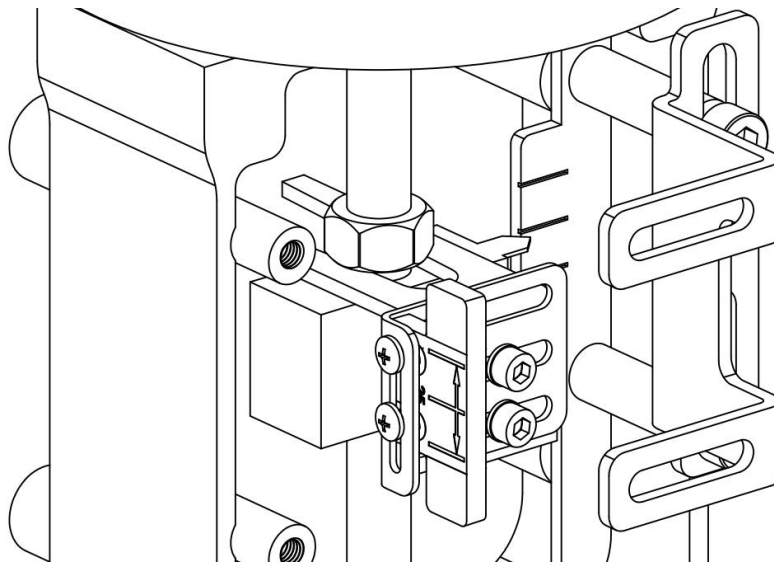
Installation of linear stroke mounting bracket and magnet bracket
